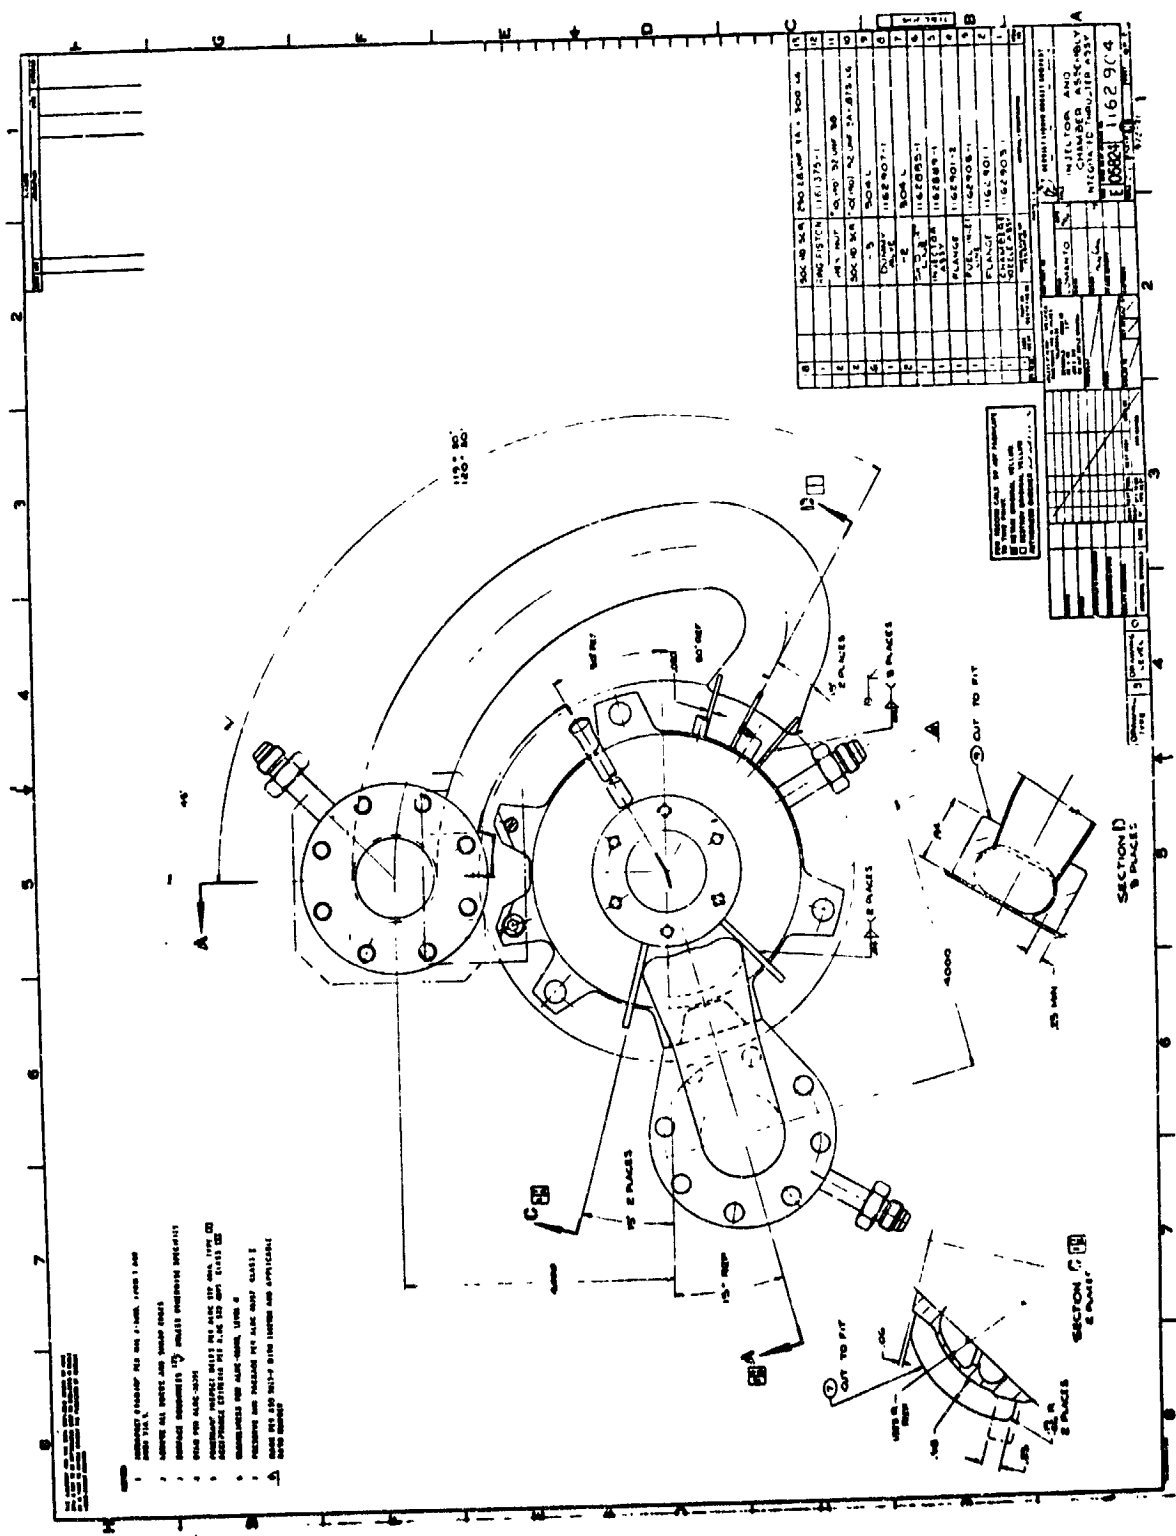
Injector and Chamber Assembly - Integrated Thruster Assembly (Sheet 1 of 2)
